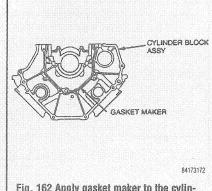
Apply gasket maker to the cylinder block as shown-4.6L engine
